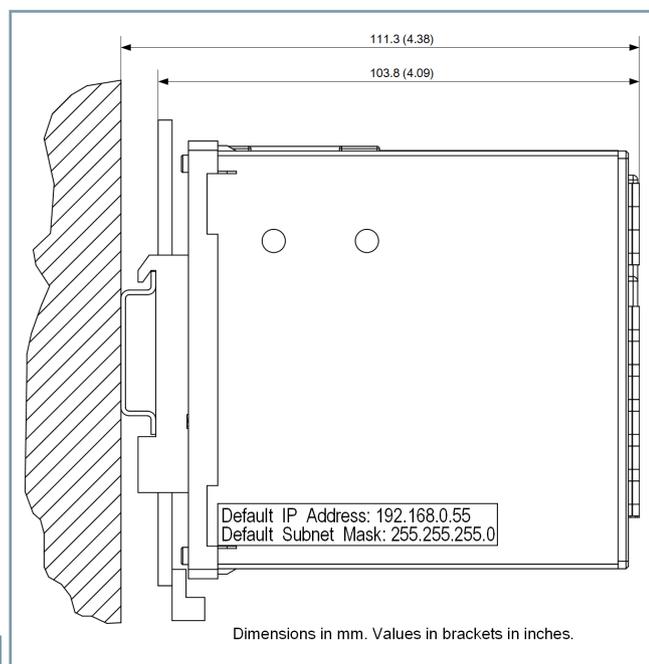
/14 Dimensions SICAM I/O-Unit 7XV5673
